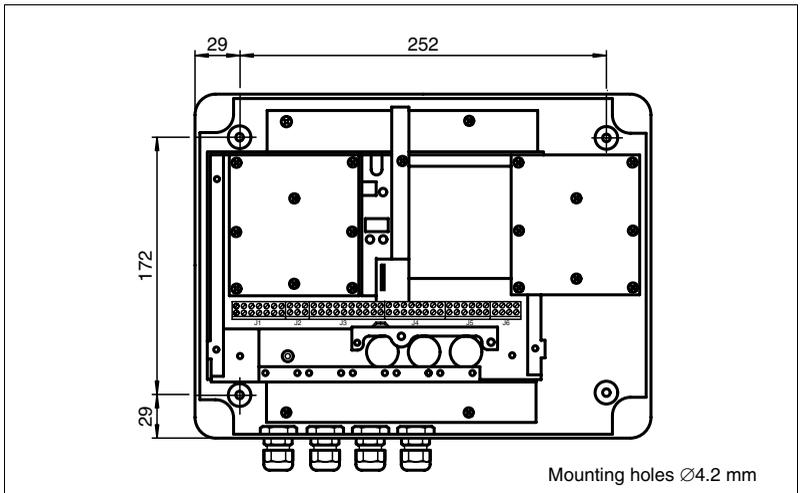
MTT6000-F51-S3 mounting hole locations
